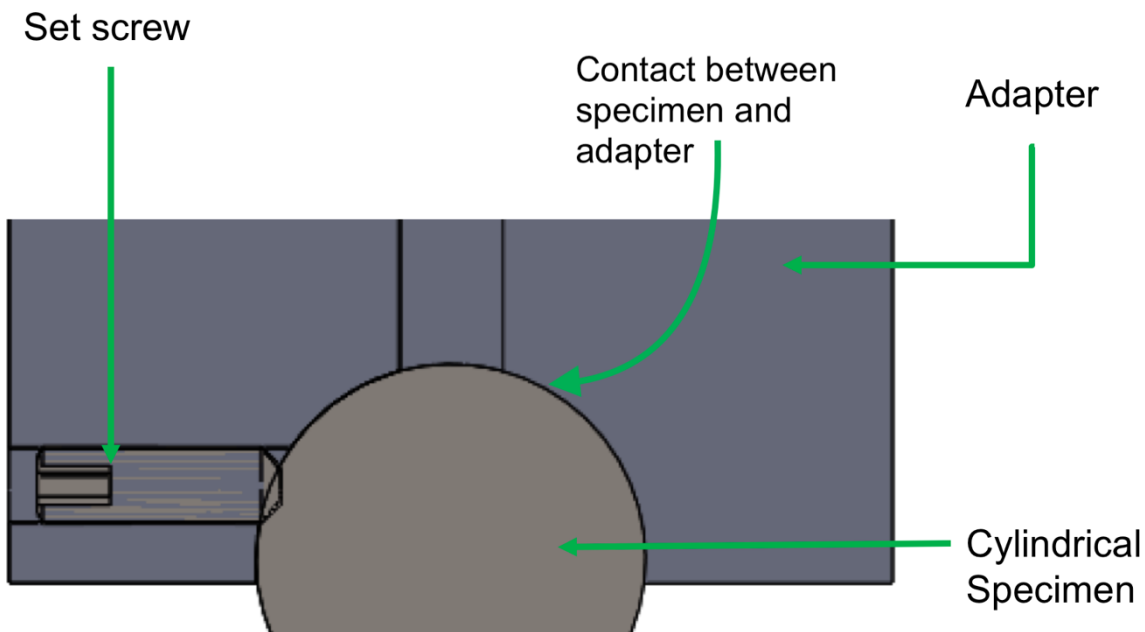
Placement of cylindrical specimen in a conventional adapter showing contact between specimen and adapter
